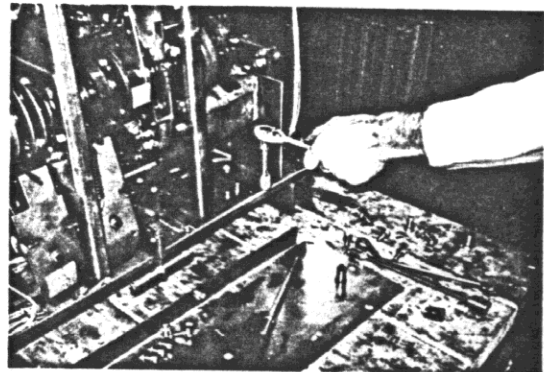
Remove One End of Oscillator Reset Spring
